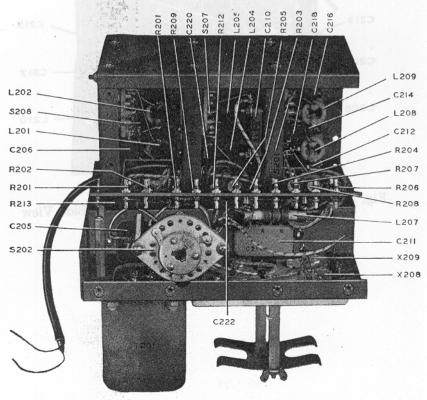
Receiver R-F Chassis Assembly—Bottom View
